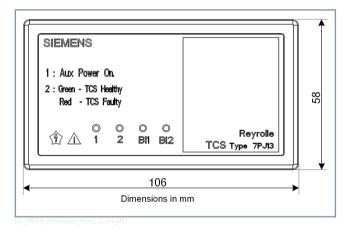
/15 Front View [MLFB 7PJ1321-5CC02-0AA0]
